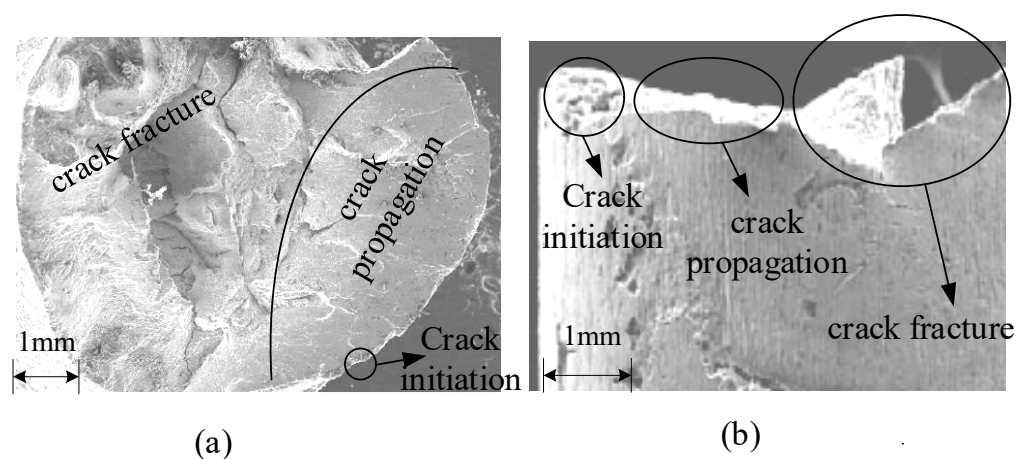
Corrosion fatigue fracture morphology. (a) Corrosion pit evolution diagram; (b) steel wire fracture diagram near corrosion pit.
